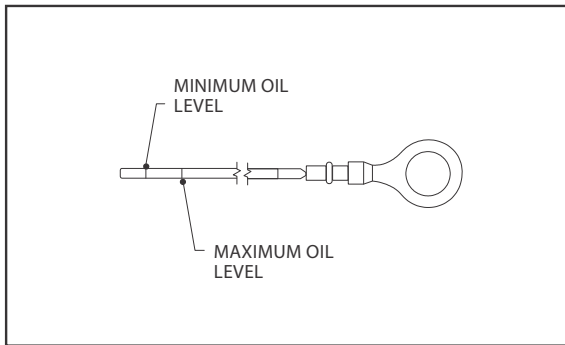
Deutz 2.9 T4F Dipstick Markings
